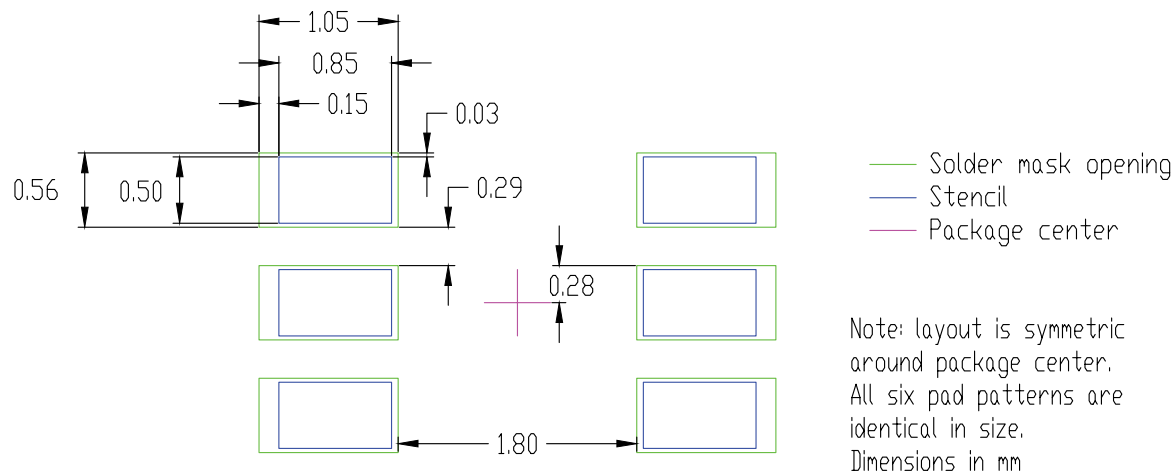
Recommended PCB solder pad layout for LUXEON 3528 RGB.
